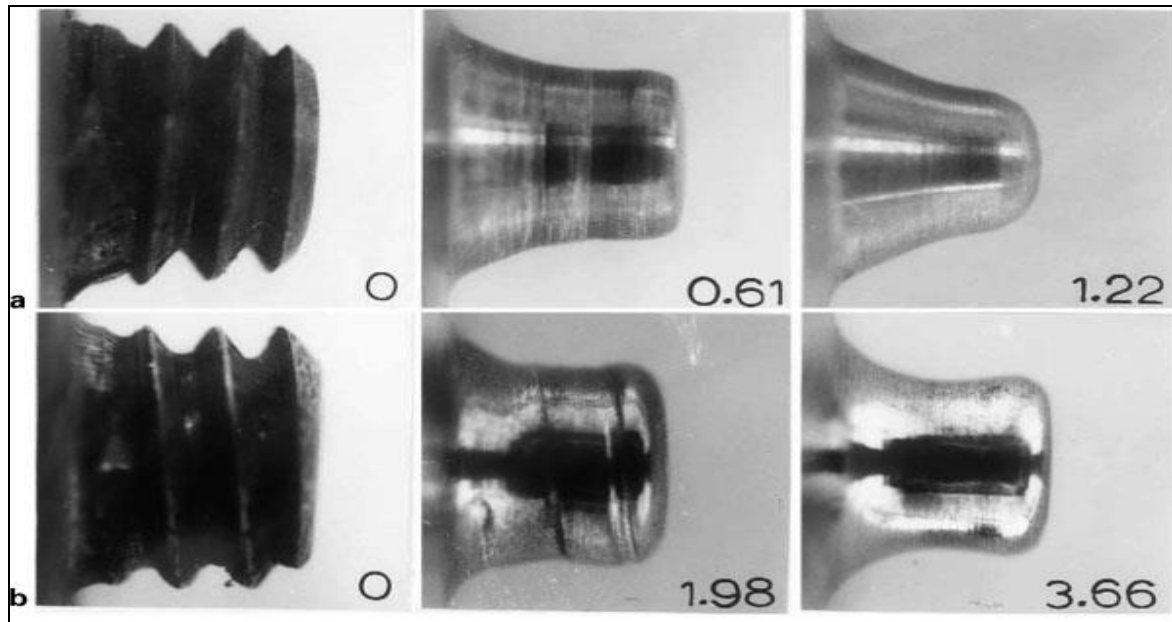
Evolution of tool shape due to wear in FSW (Taken from friction stir welding tools R. Rai¹, A. De², H. K. D. H. Bhadeshia³ and T. DebRoy*¹)
